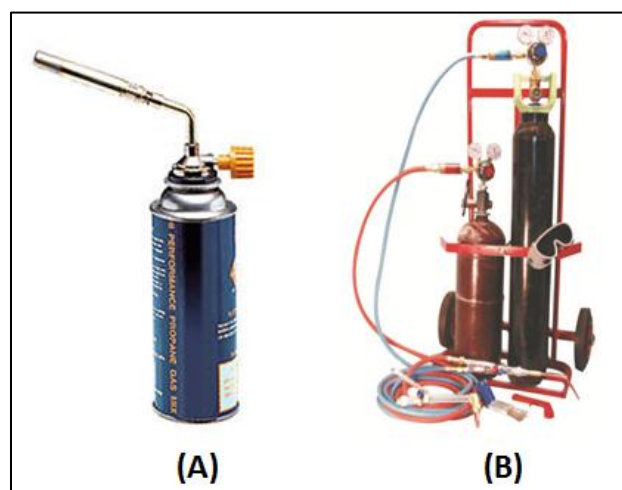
(A) Brazing blow torch, (B) Gas welding equipment
